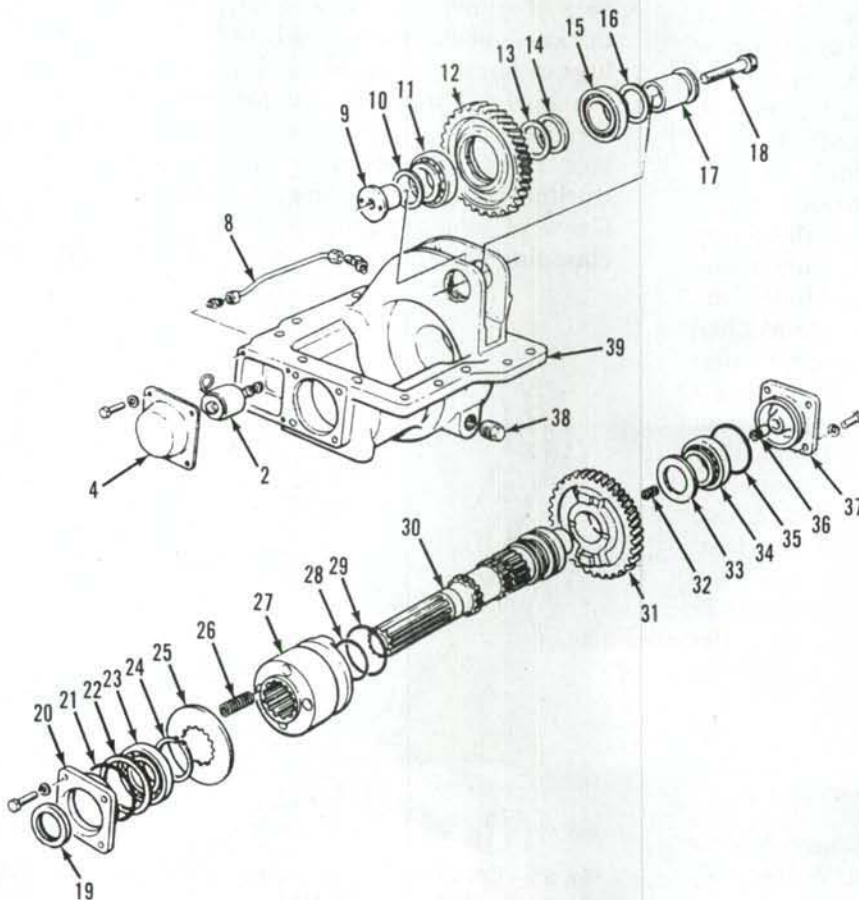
Exploded view of four-wheel drive transfer gearbox used on models with 8 × 2 and 16 × 4 transmissions.
